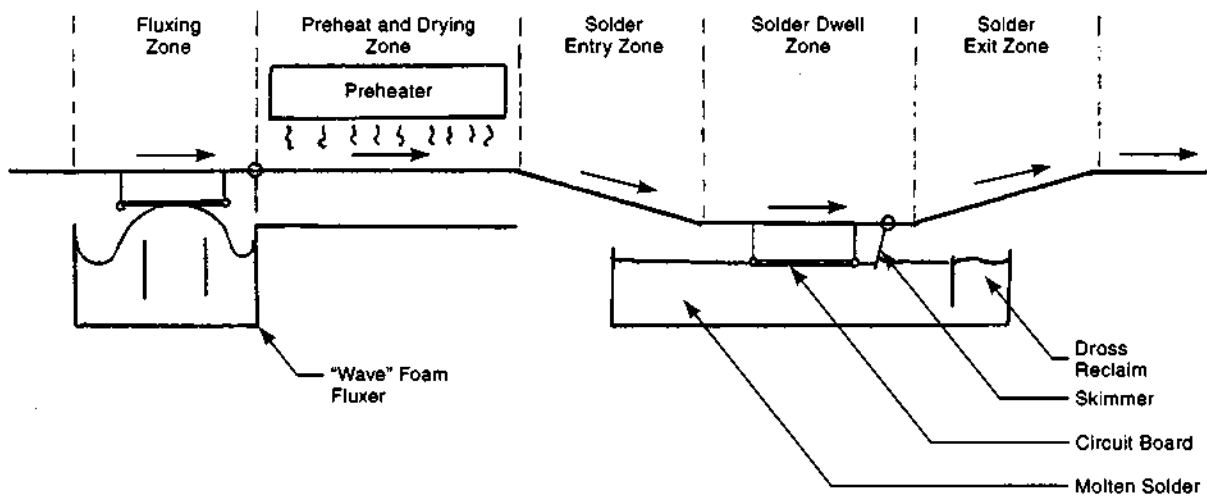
C4 A schematic view of the equipment and sequence of operations involved in drag soldering printed circuit boards.
